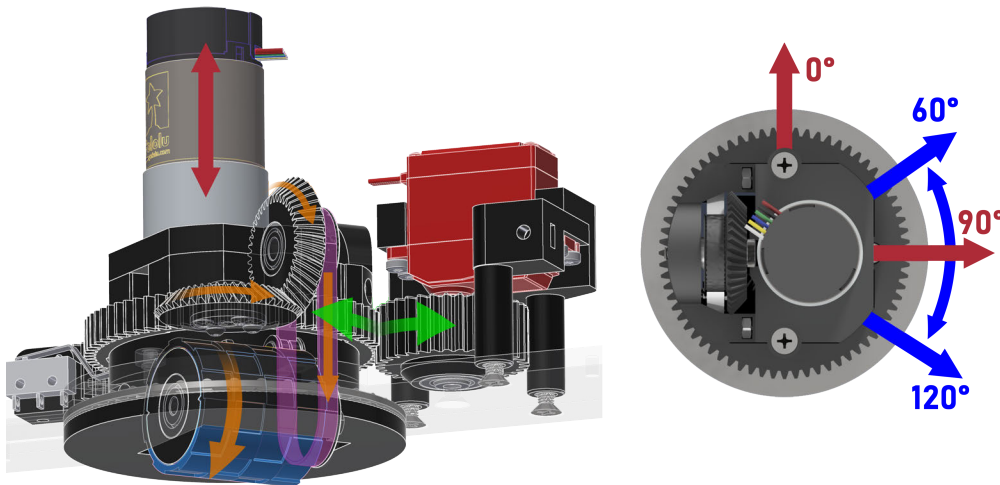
Omnidirectional Drive Module Full Design: Driving, Steering, & Sensing
